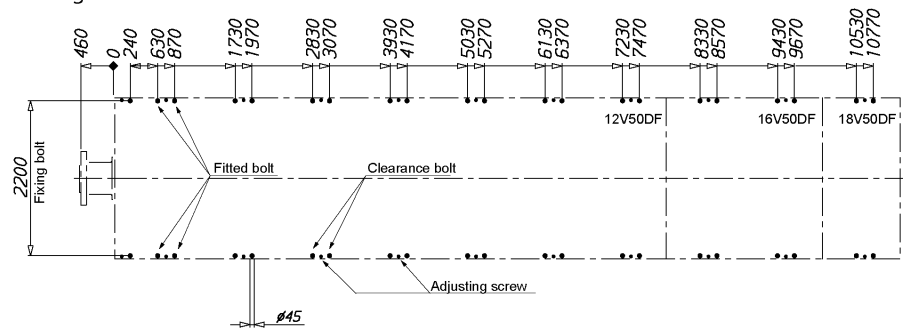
Seating and fastening, rigidly mounted in-line engines on steel chocks (1V69L1651a)
